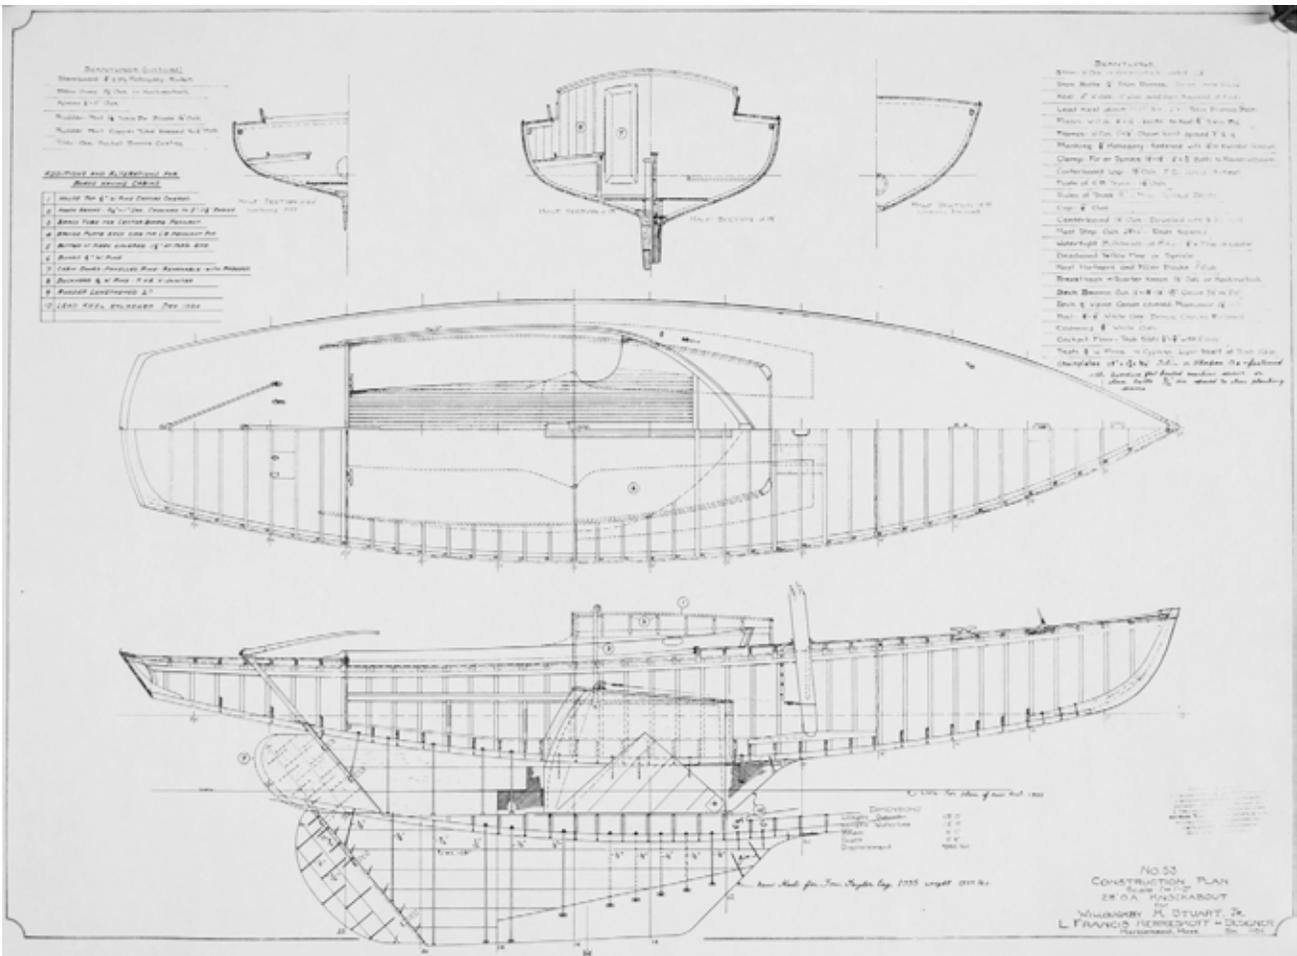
Design No. 53 plans showing the original plans for BEN with the modifications for PALMETTO drawn on top.
